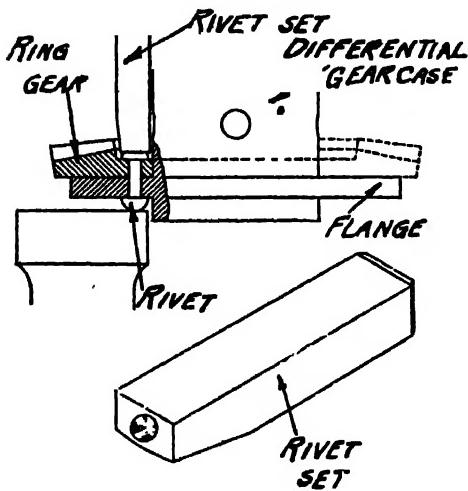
How to Rivet Driving Gear to Differential Gear Case.
